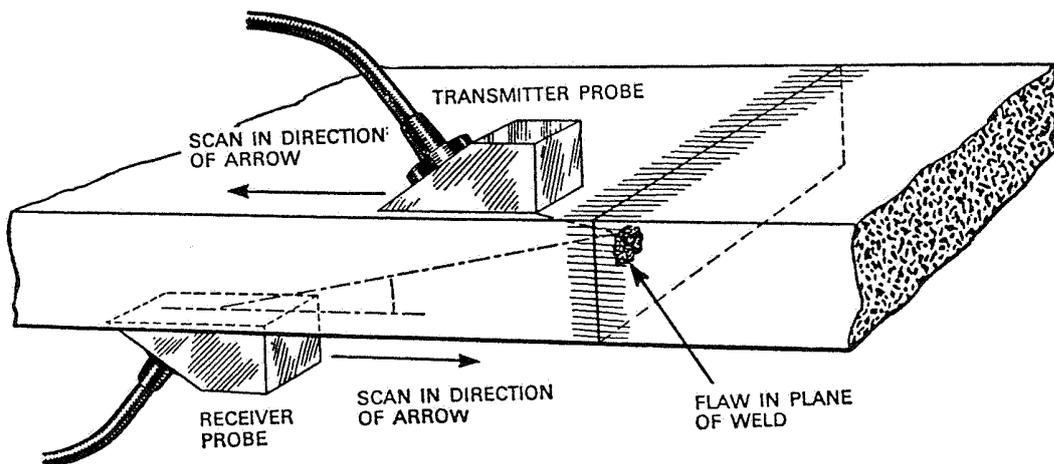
SCANNING METHOD FOR FINDING FLAWS IN FLASH BUTT WELDS
